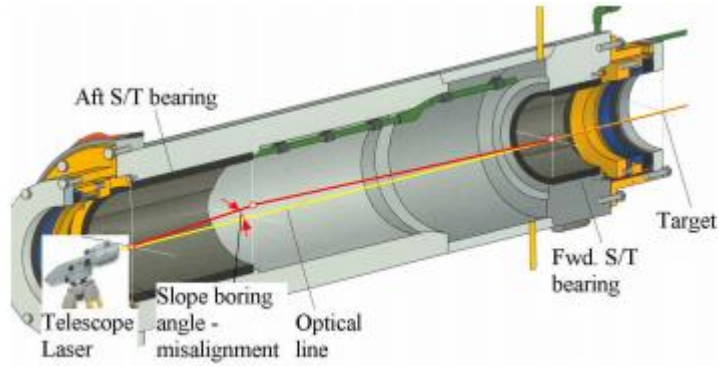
SLOPE BORING ARRANGEMENT [7]
